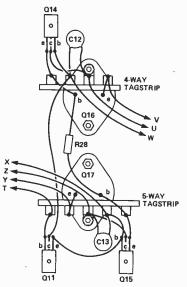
Wiring diagram for the components mounted on the heatsink.
